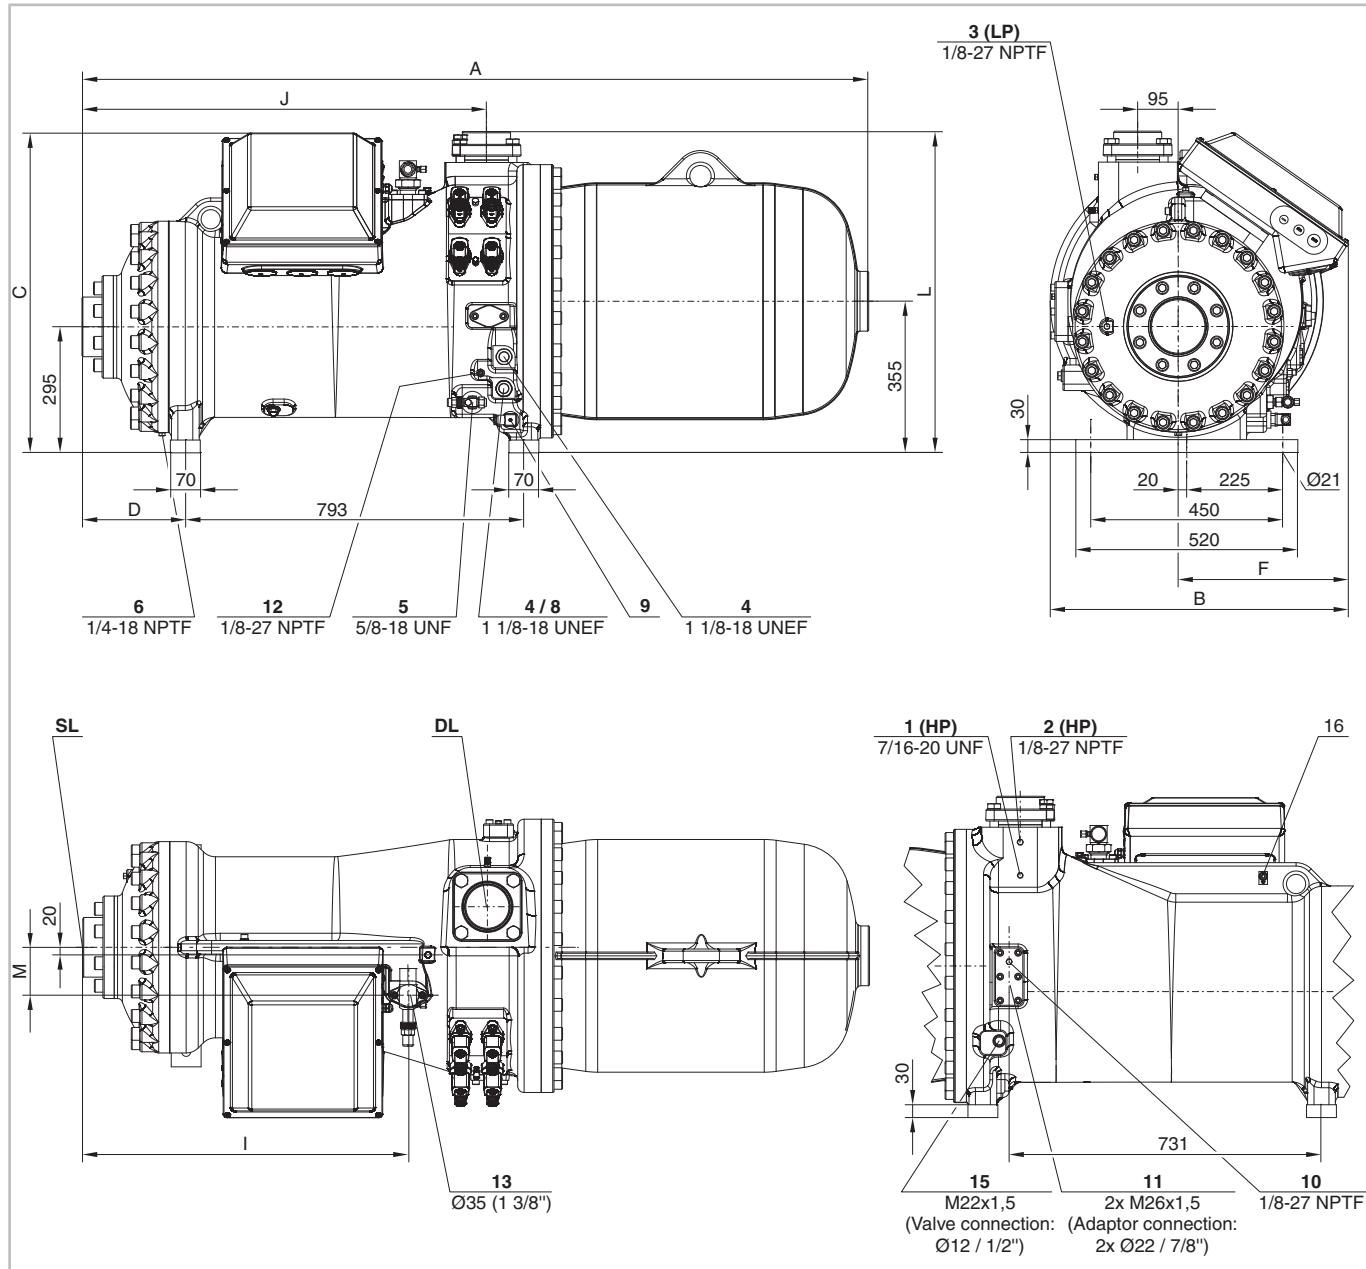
Dimensional drawing CSH9553-180(Y) .. CSH95113-320Y
